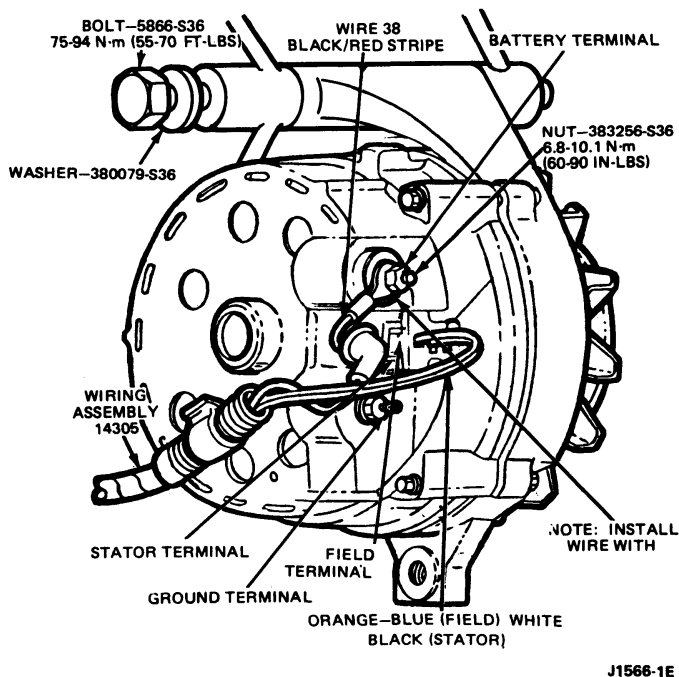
Typical Wiring Connections—Side Terminal Alternator 4.9L (300 CID) Engine Connections Shown
